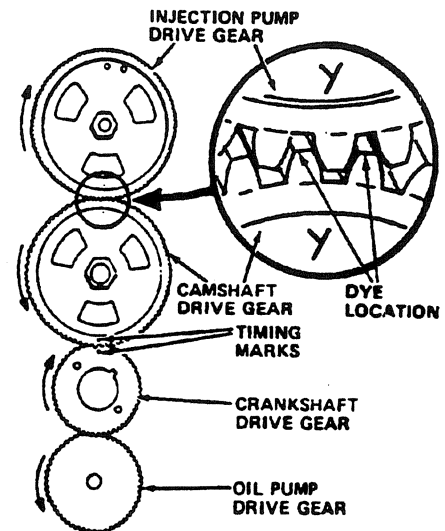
Removing Adapter Housing and Marking Injection Pump Gear
